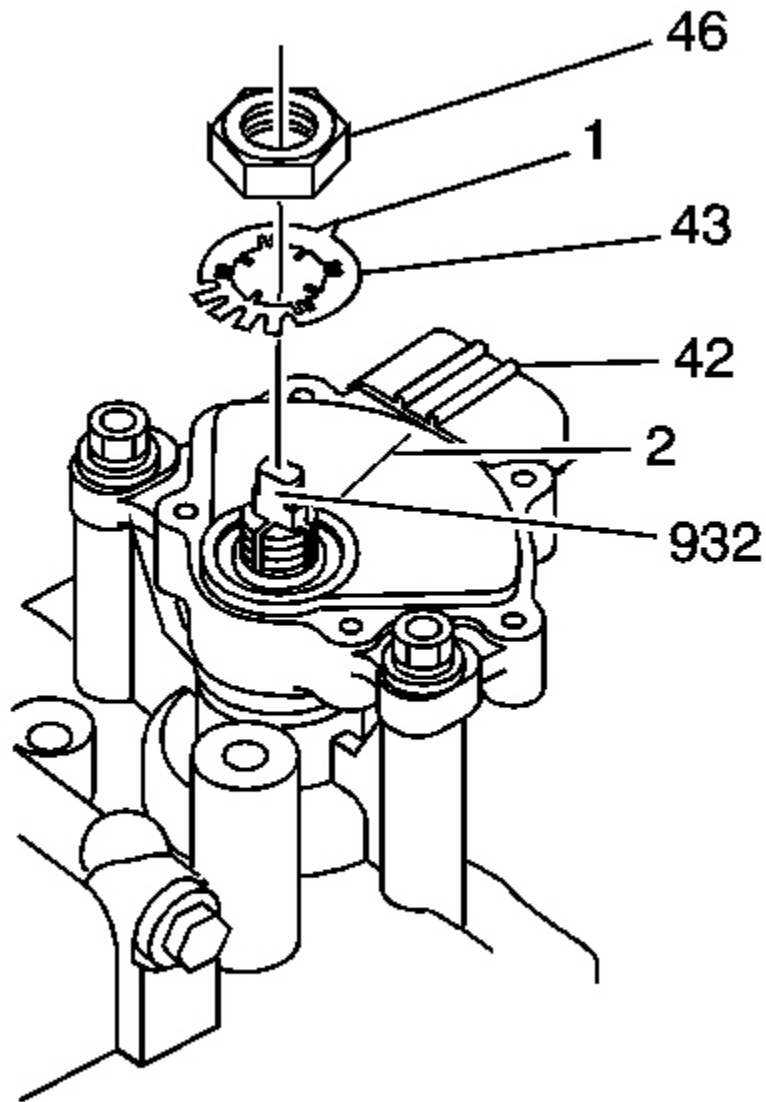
Park/Neutral Position Switch, Manual Shift Shaft & Lock Washer
